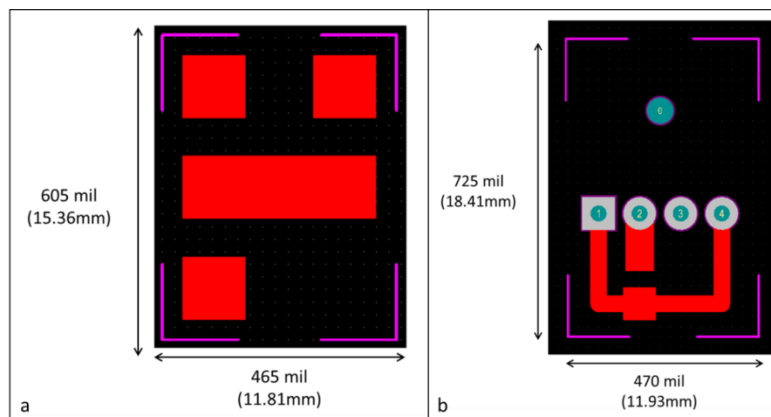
PCB design. (a) The PCB used for matching and active detuning circuit. (b) Preamplifier socket board.
